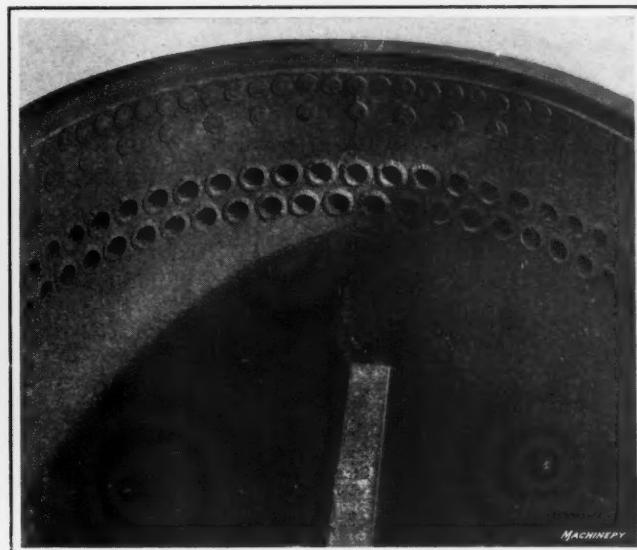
Tubular Transformer Tank, showing Tubes after having been welded to Shell
